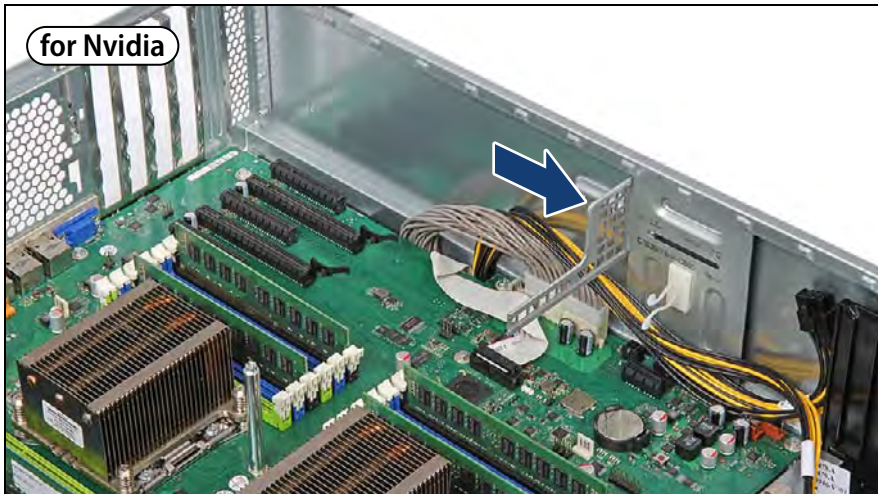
Installing the GPGPU card mounting bracket (Nvidia) (C)
